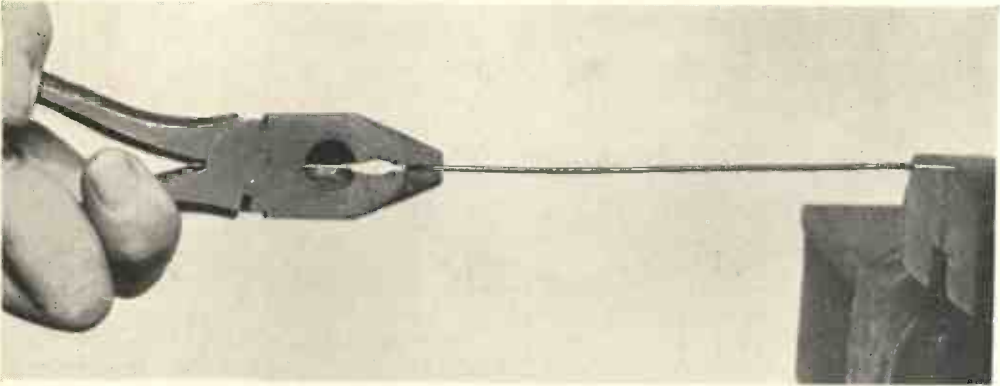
STRETCHING A WIRE TO REMOVE THE KINKS AND BENDS.
